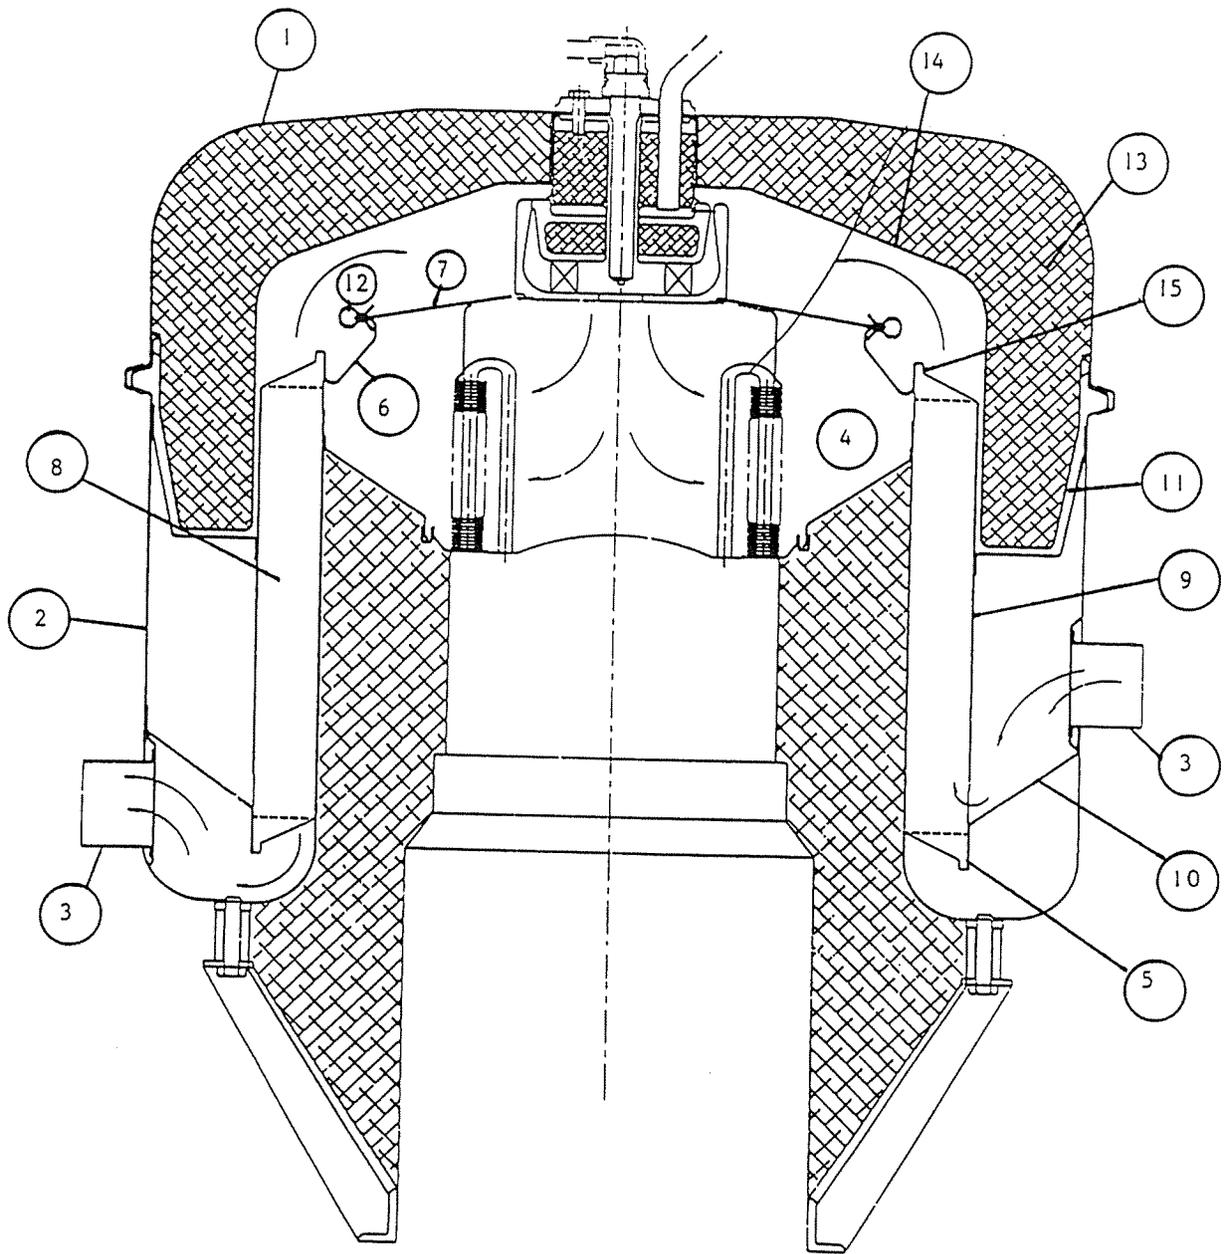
Mechanical Technology, Inc., external heat system with tubular heater head.
